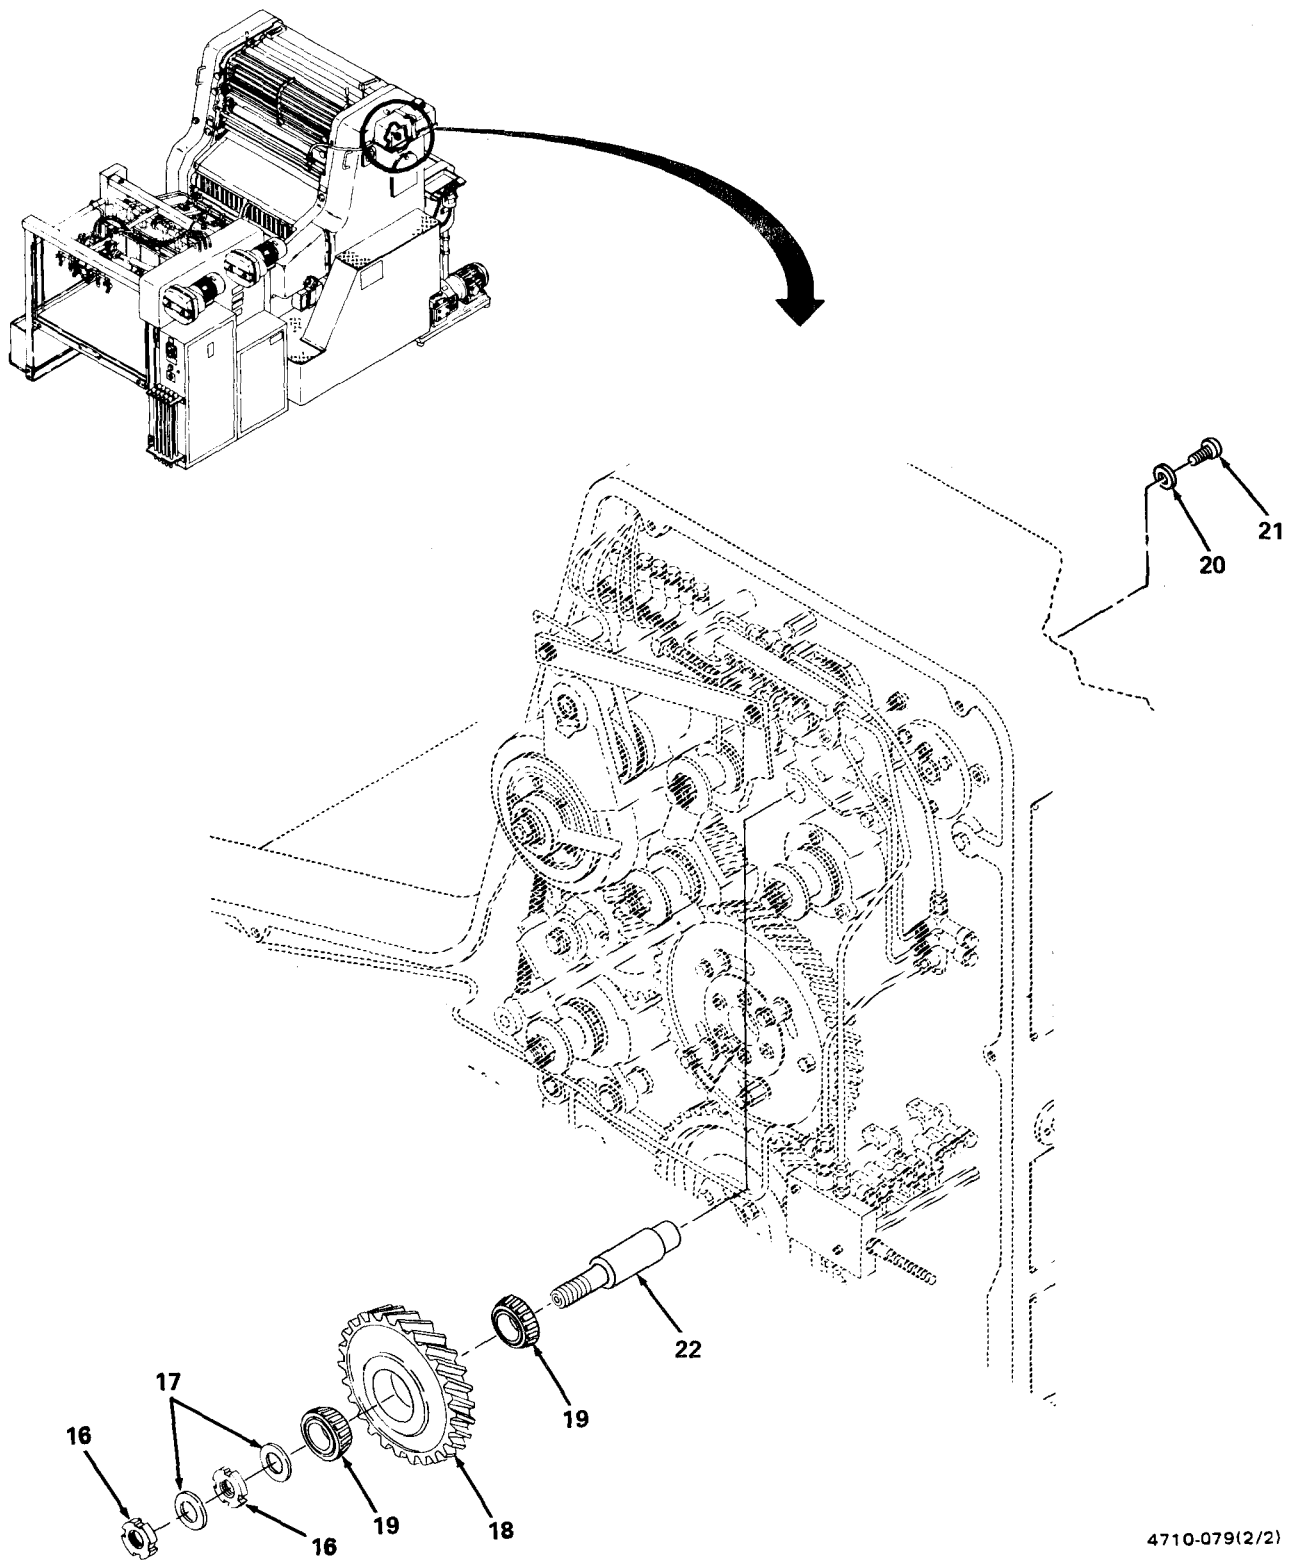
Driving Mechanism Removal (Sheet 2 of 2).
